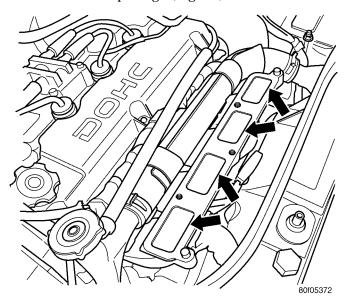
LOWER INTAKE MANIFOLD - 2.4L TURBO
